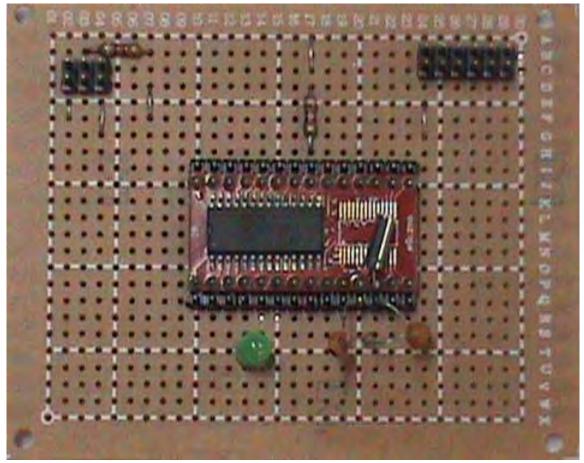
The Customized Z8 Encore! XP F1680 Series Board and Universal PCB
